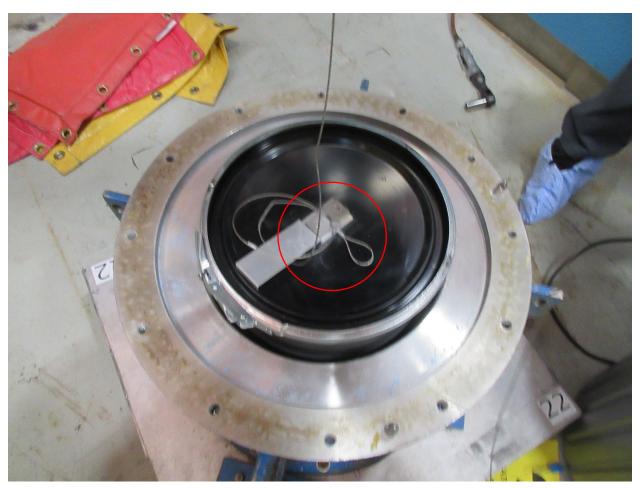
View of top of pail, showing crimped loop on wrong side of attachment block, and cable routed underneath "coil keeper" part
